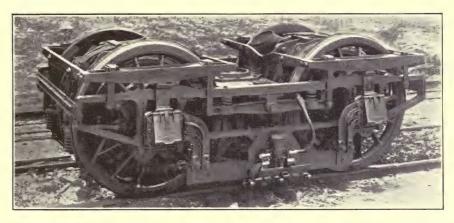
New York, New Faven and Hartford. Passenger Motor Truck and Gearless Motor.
